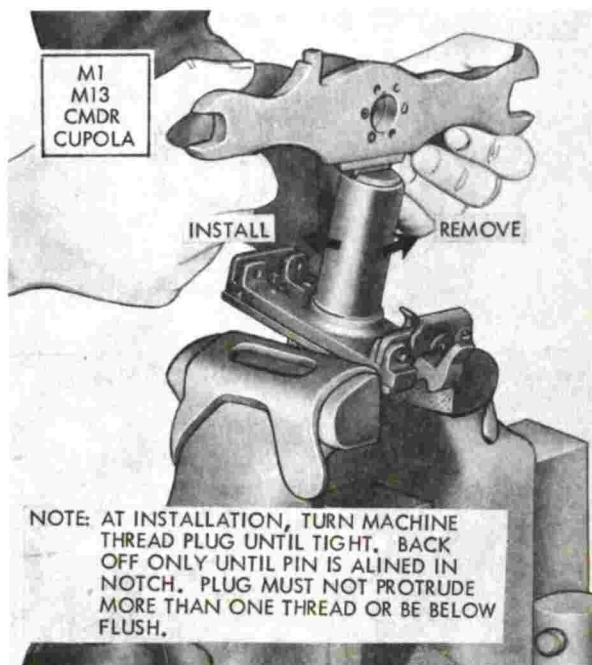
Disassembly/assembly of back plate group (M1, M13, Commander's Cupola).
